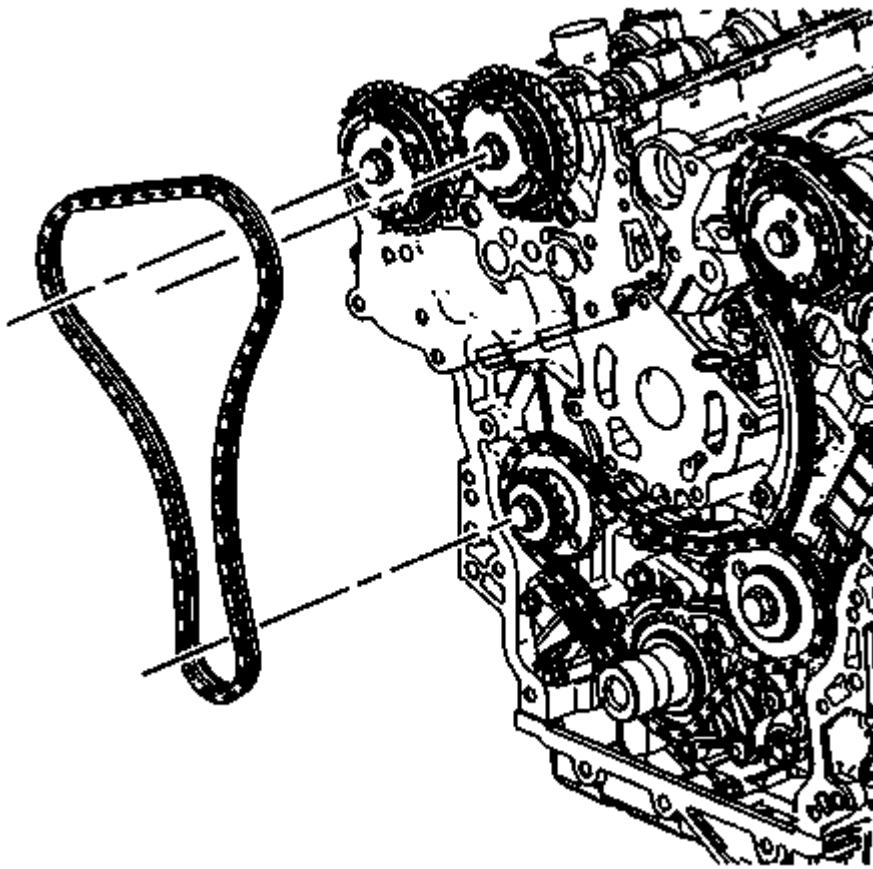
View Of Right Bank Secondary Camshaft Drive Chain
